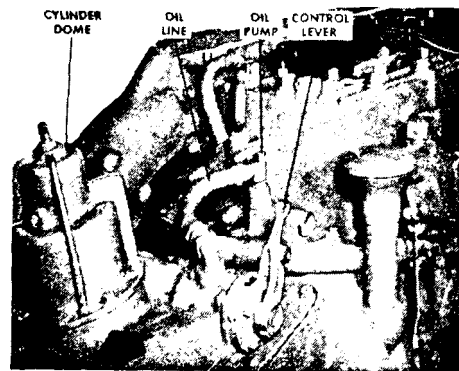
Gray Hydraulic Attachment for Paragon Reverse Gear
